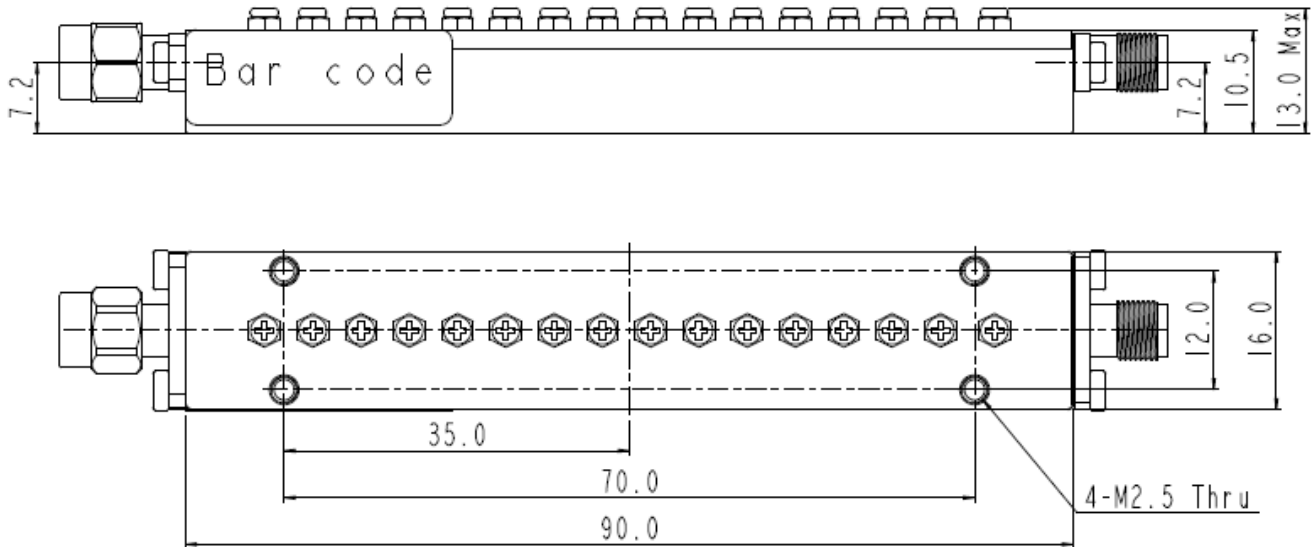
JX-CF1-14.1G18G-S20 front panel layout
